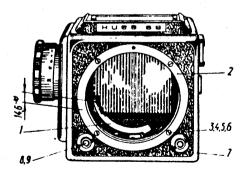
Camera KIEV 88 (second view): 1—lever 6.354 344; 2—ring 8.241 011; 3—screw 8.903 041; 4—shim 8.680.006; 5—packing ring 8.680.007; 6—shim 8.680.010; 7—facing 8.645 045; 8—hutton 6.356 003; 9—pusher 8.352 001
